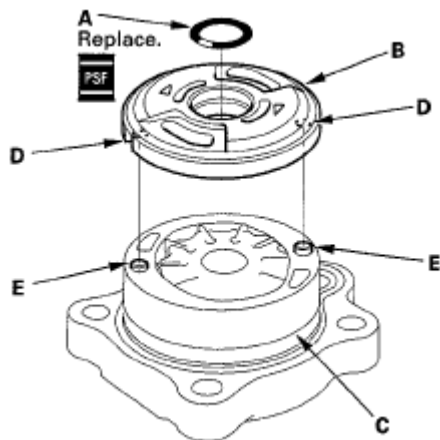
Identifying Roll Pin Set Holes In Side Plate With Roll Pins
